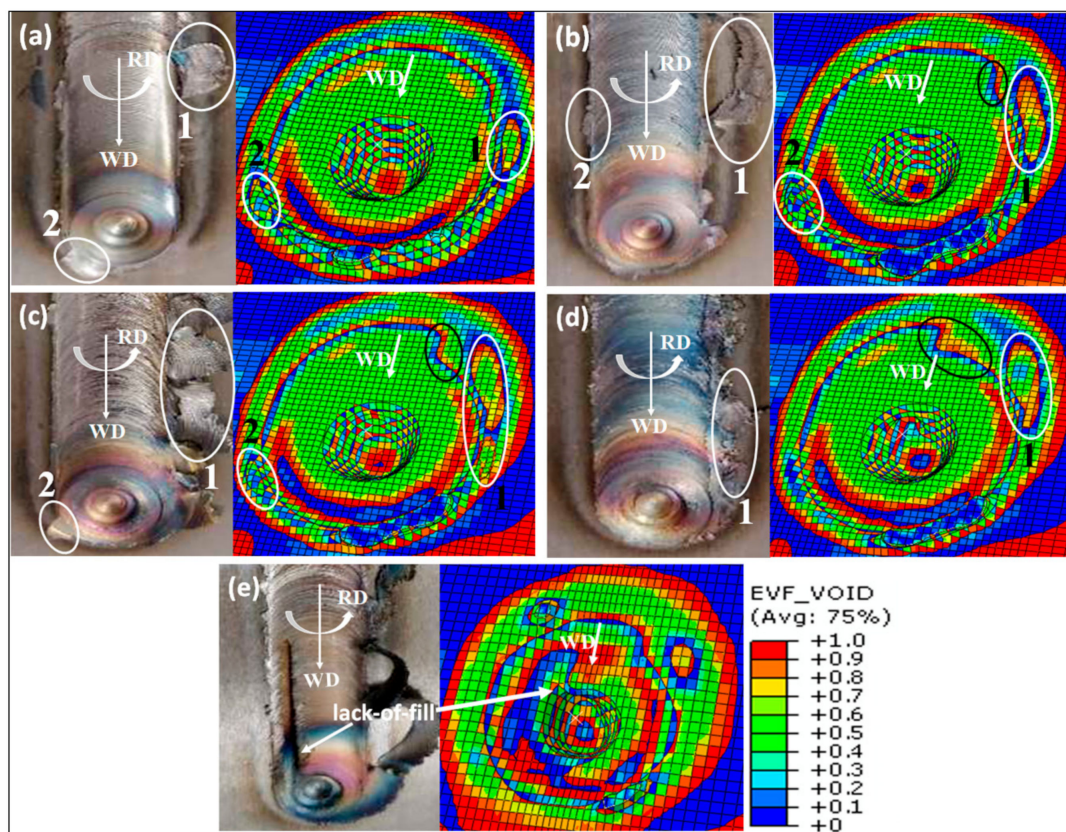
Visualization of the generated flash and weld surface appearance experimentally and numerically using EVF-VOID for samples welded at (a) 250 rpm, (b) 350 rpm, (c) 450 rpm, (d) 550 rpm, and (e) 650 rpm.
